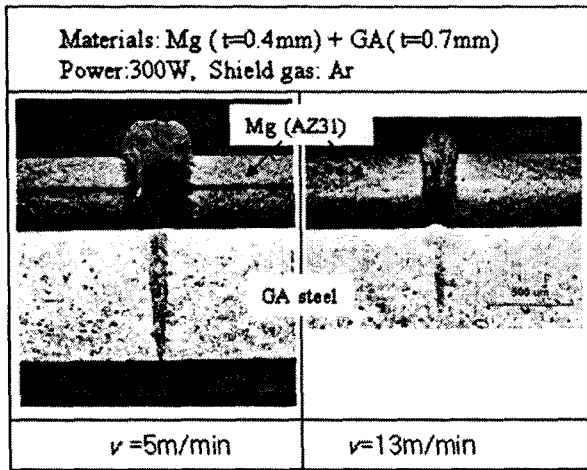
Cross sections of bead in lap welding (Mg alloy - GA steel)
